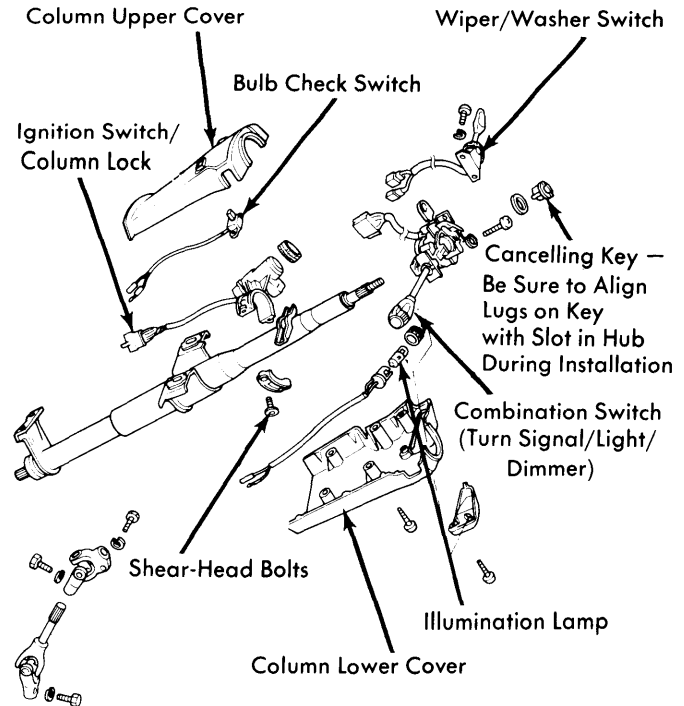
Disassembled View of Upper Column Components (Accord Shown; Civic Similar)
